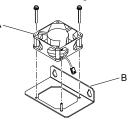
Remove the Circuit Board Cooling Fan Units
